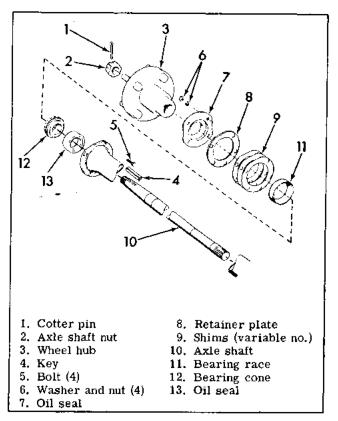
B-12. Rear Axle (1972 and Earlier) - Exploded View
